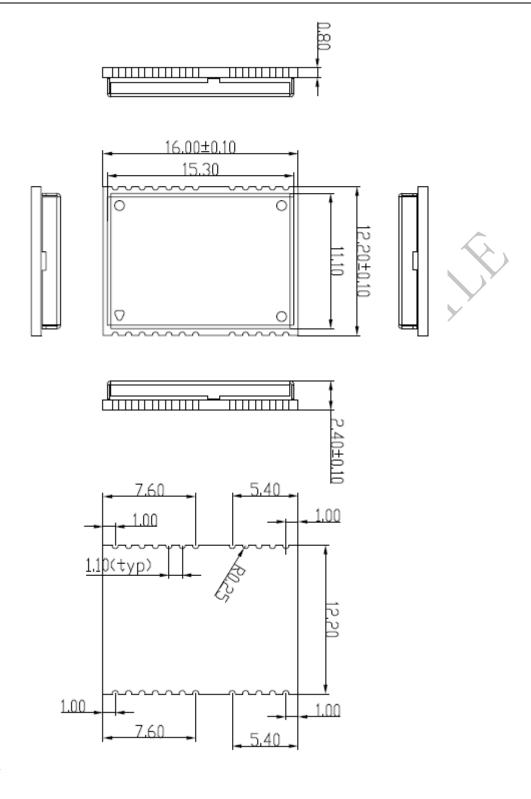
SIM28 mechanical dimensions (Unit: mm)
